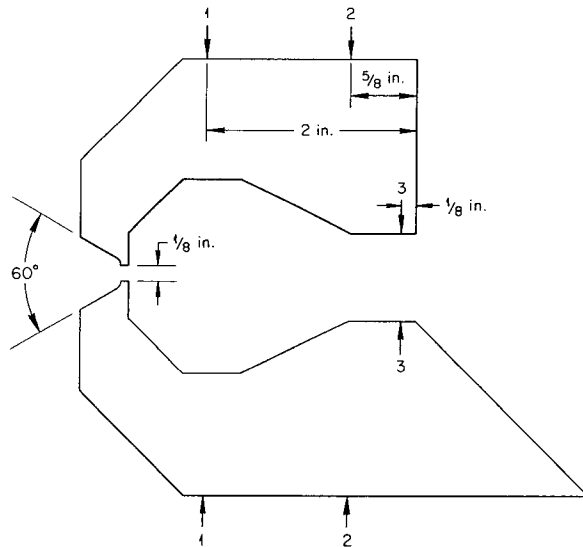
Micrometer Measurement Details - Inert-Arc-Welded Primary Pump Shrink Test.
